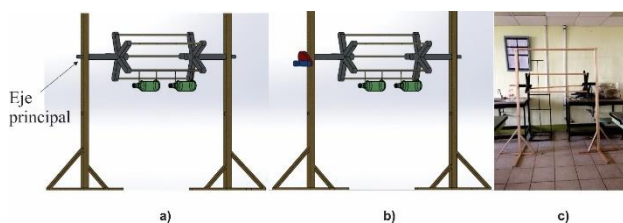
Prototype 1. a) In CAD indicating the main axis to generate the movement. b) In CAD with manual drive. c) Constructed
